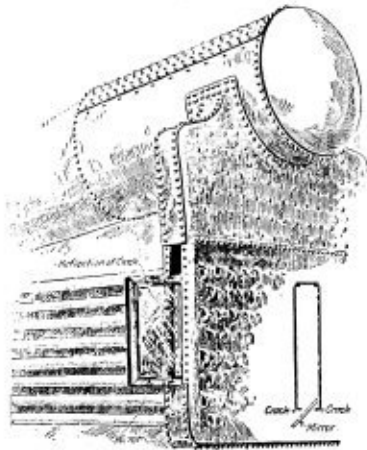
Locating Crack with a Mirror in Detroit Soap Works Boiler
